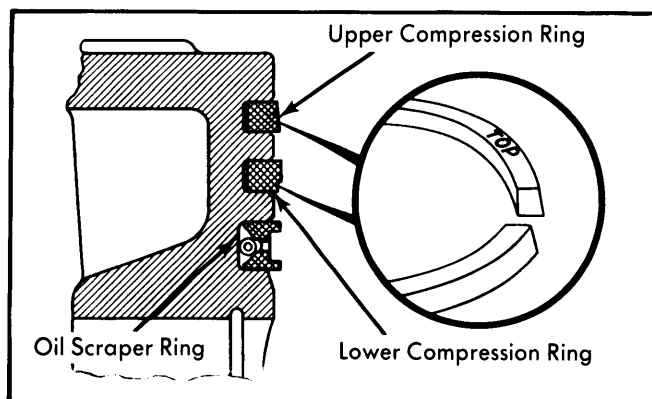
Piston Ring Installation — Word TOP Must Face Piston Crown
